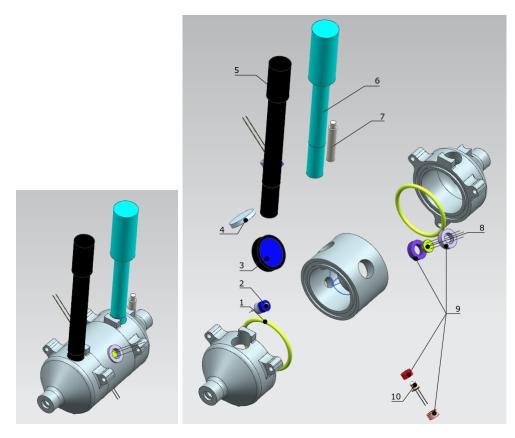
Sensor chamber: assembled (left) and exploded view (right)
